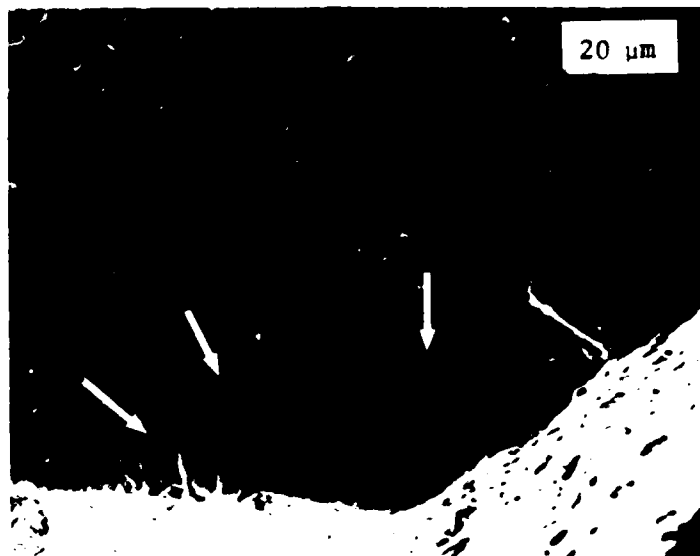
SEM photo of the fracture surface of a specimen revealing the strength-limiting defect is machining damage.
